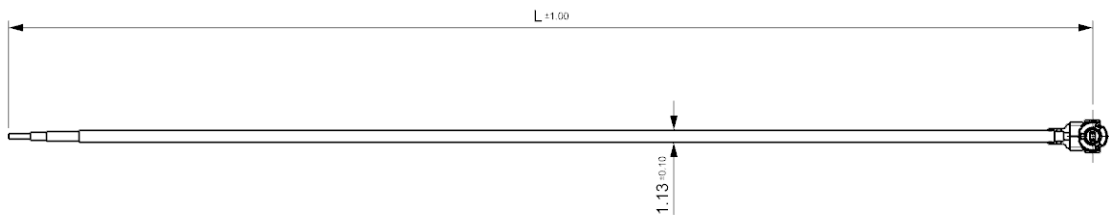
CABLE LINE VIEW OF ULTRA WIDEBAND PCB ANTENNA
